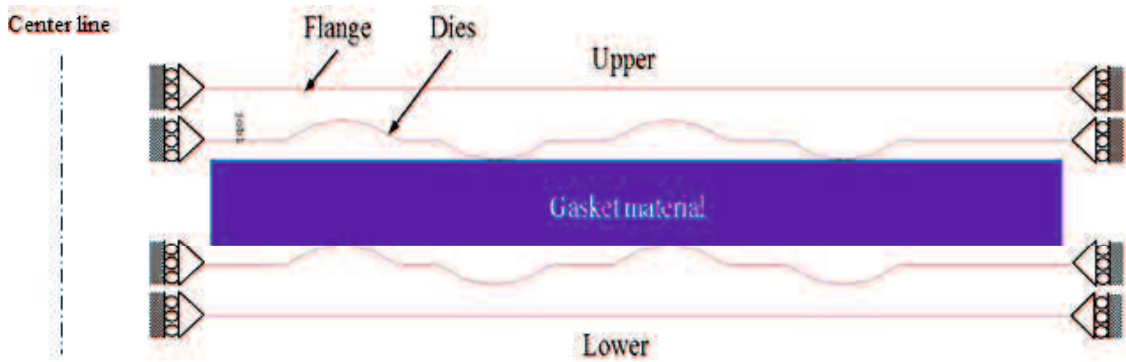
Setting-up of gasket material, dies and flange before forming and tightening
